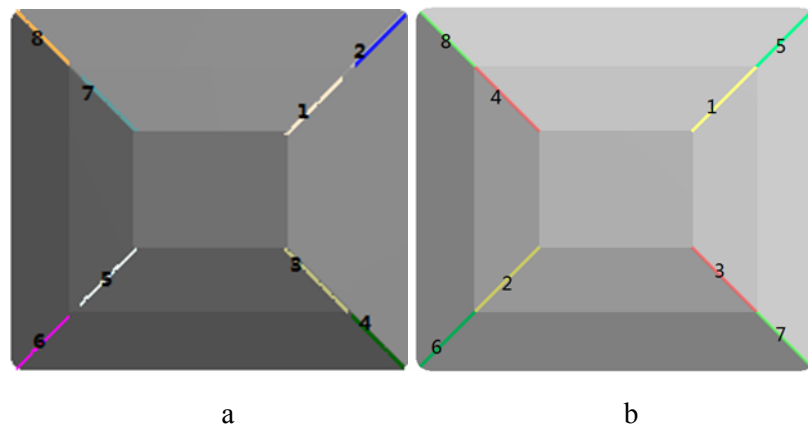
Three-dimensional solid model of vacuum cover (a – current welding sequence; b – welding sequence after weld adjustment).
